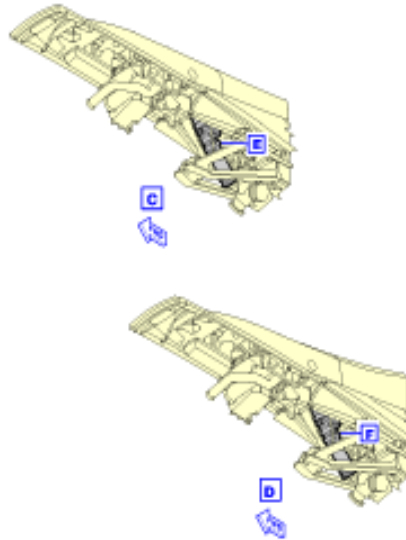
B (SHEET 1/3) - Overpressure Valve
